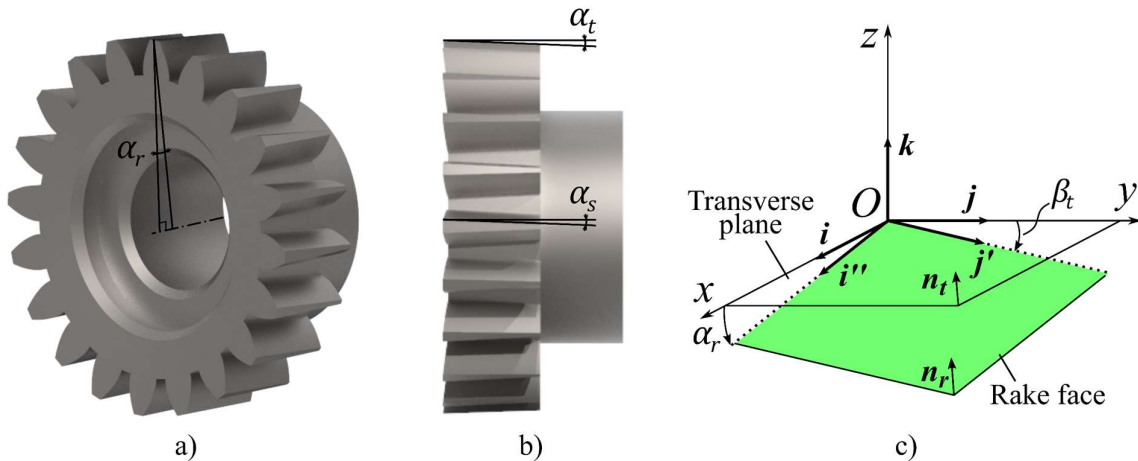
a) Tool rake angle; b) tool top and side relief angle; c) tool design planes.
